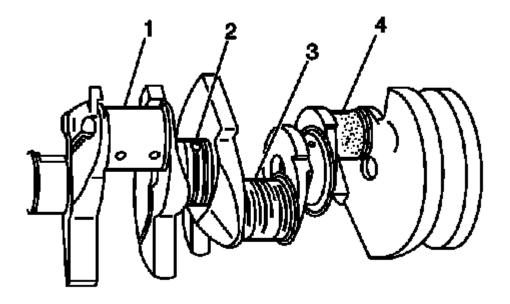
View Of Crankshaft Position Reluctor Ring Courtesy of GENERAL MOTORS CORP.
